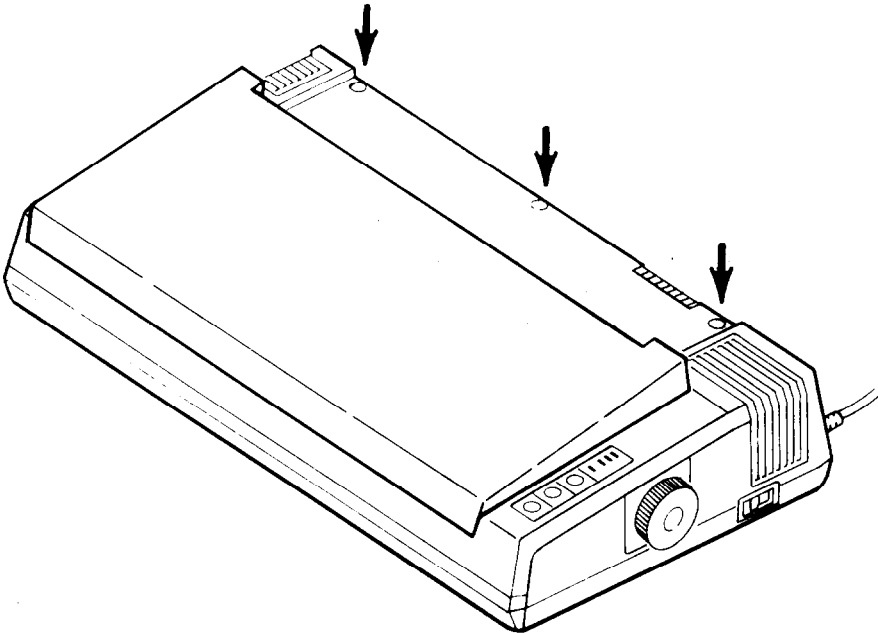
Three mounting screws hold the Gemini-15X upper casing in place.
